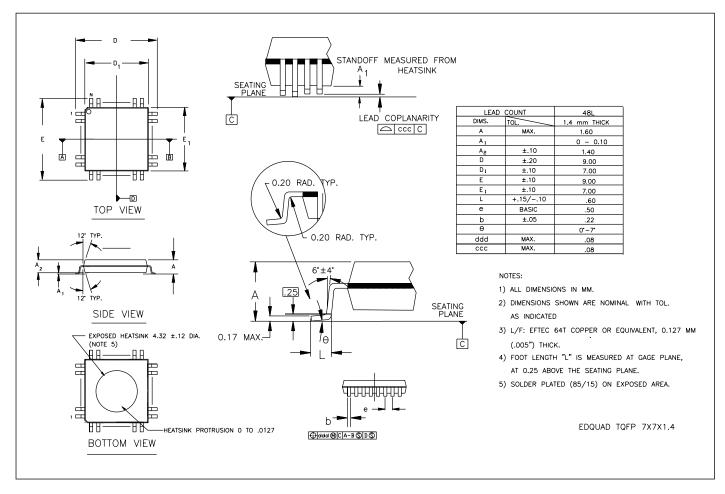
Package 48 pin TQFP-EDQUAD. All dimensions are in mm.
